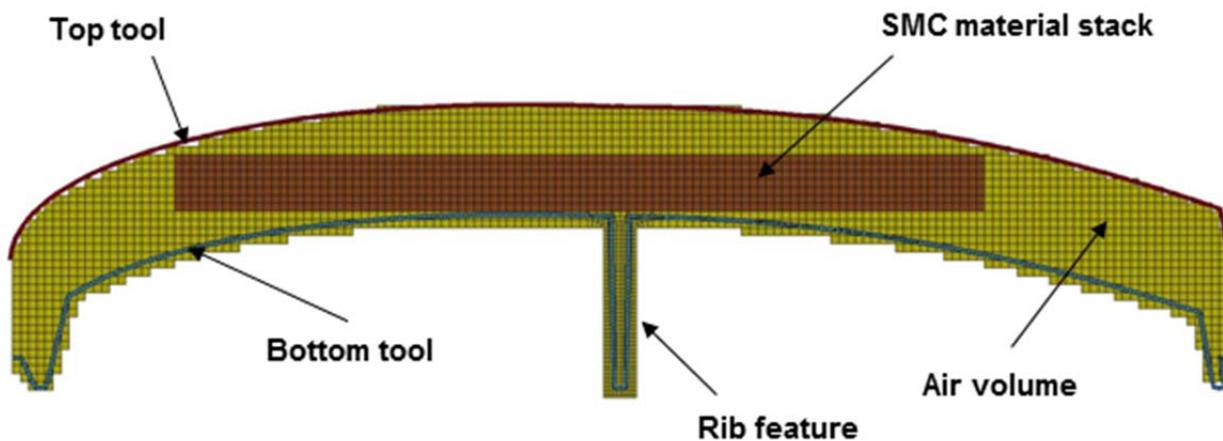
Two dimensional SMC compression spoiler tool model developed in LS-DYNA
